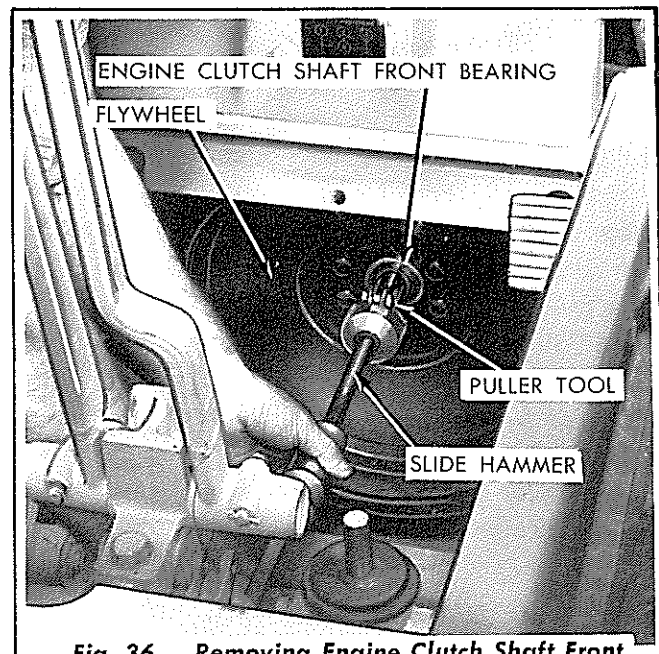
Removing Engine Clutch Shaft Front Bearing — Engine Installed
